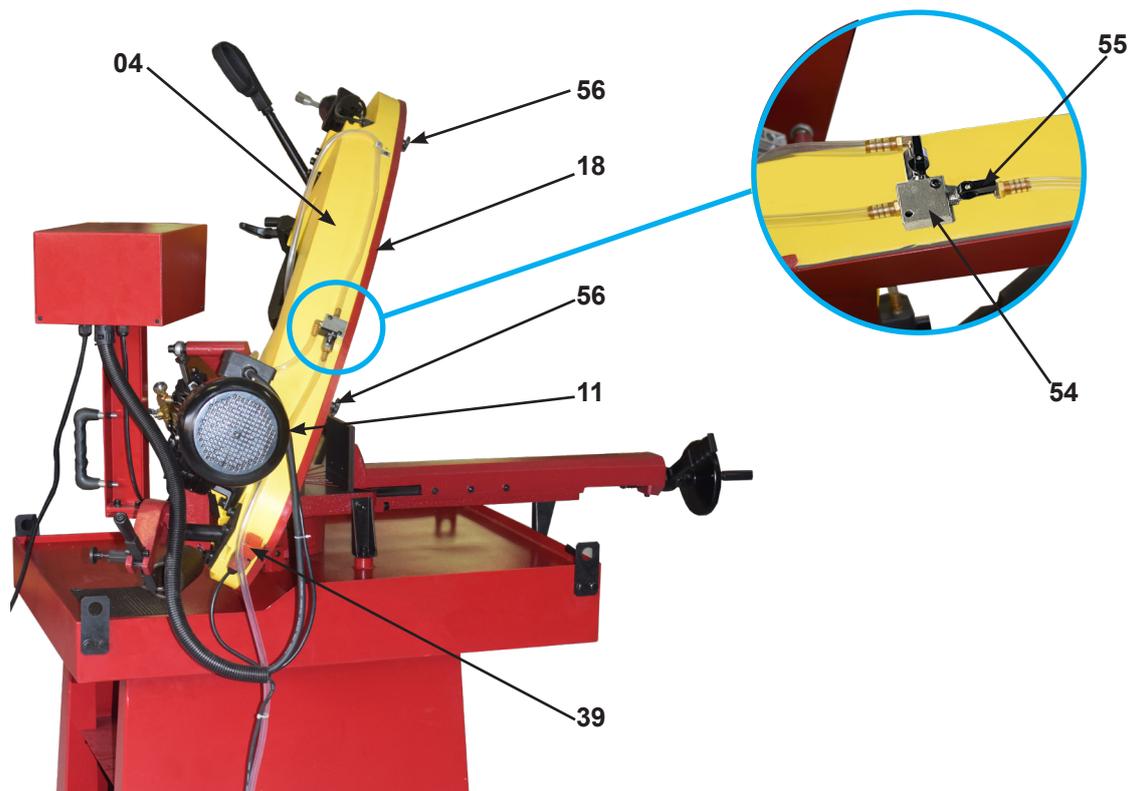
BOW BACK COVER AND INNER PROTECTION OF THE MOBILE GUIDE
